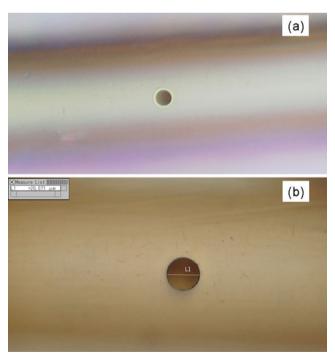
A 20 μ m hole etched on a polyimide tube with SiN_x as etching mask before (a) and after (b) SiN_x is removed
